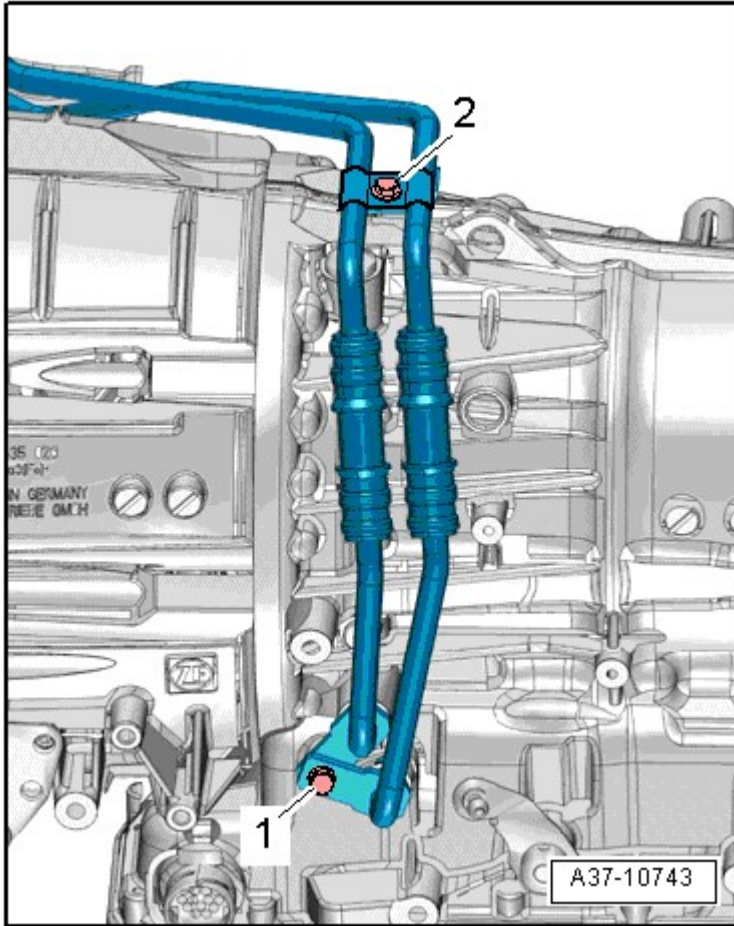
Identifying Bolts And ATF Pipes From Transmission
